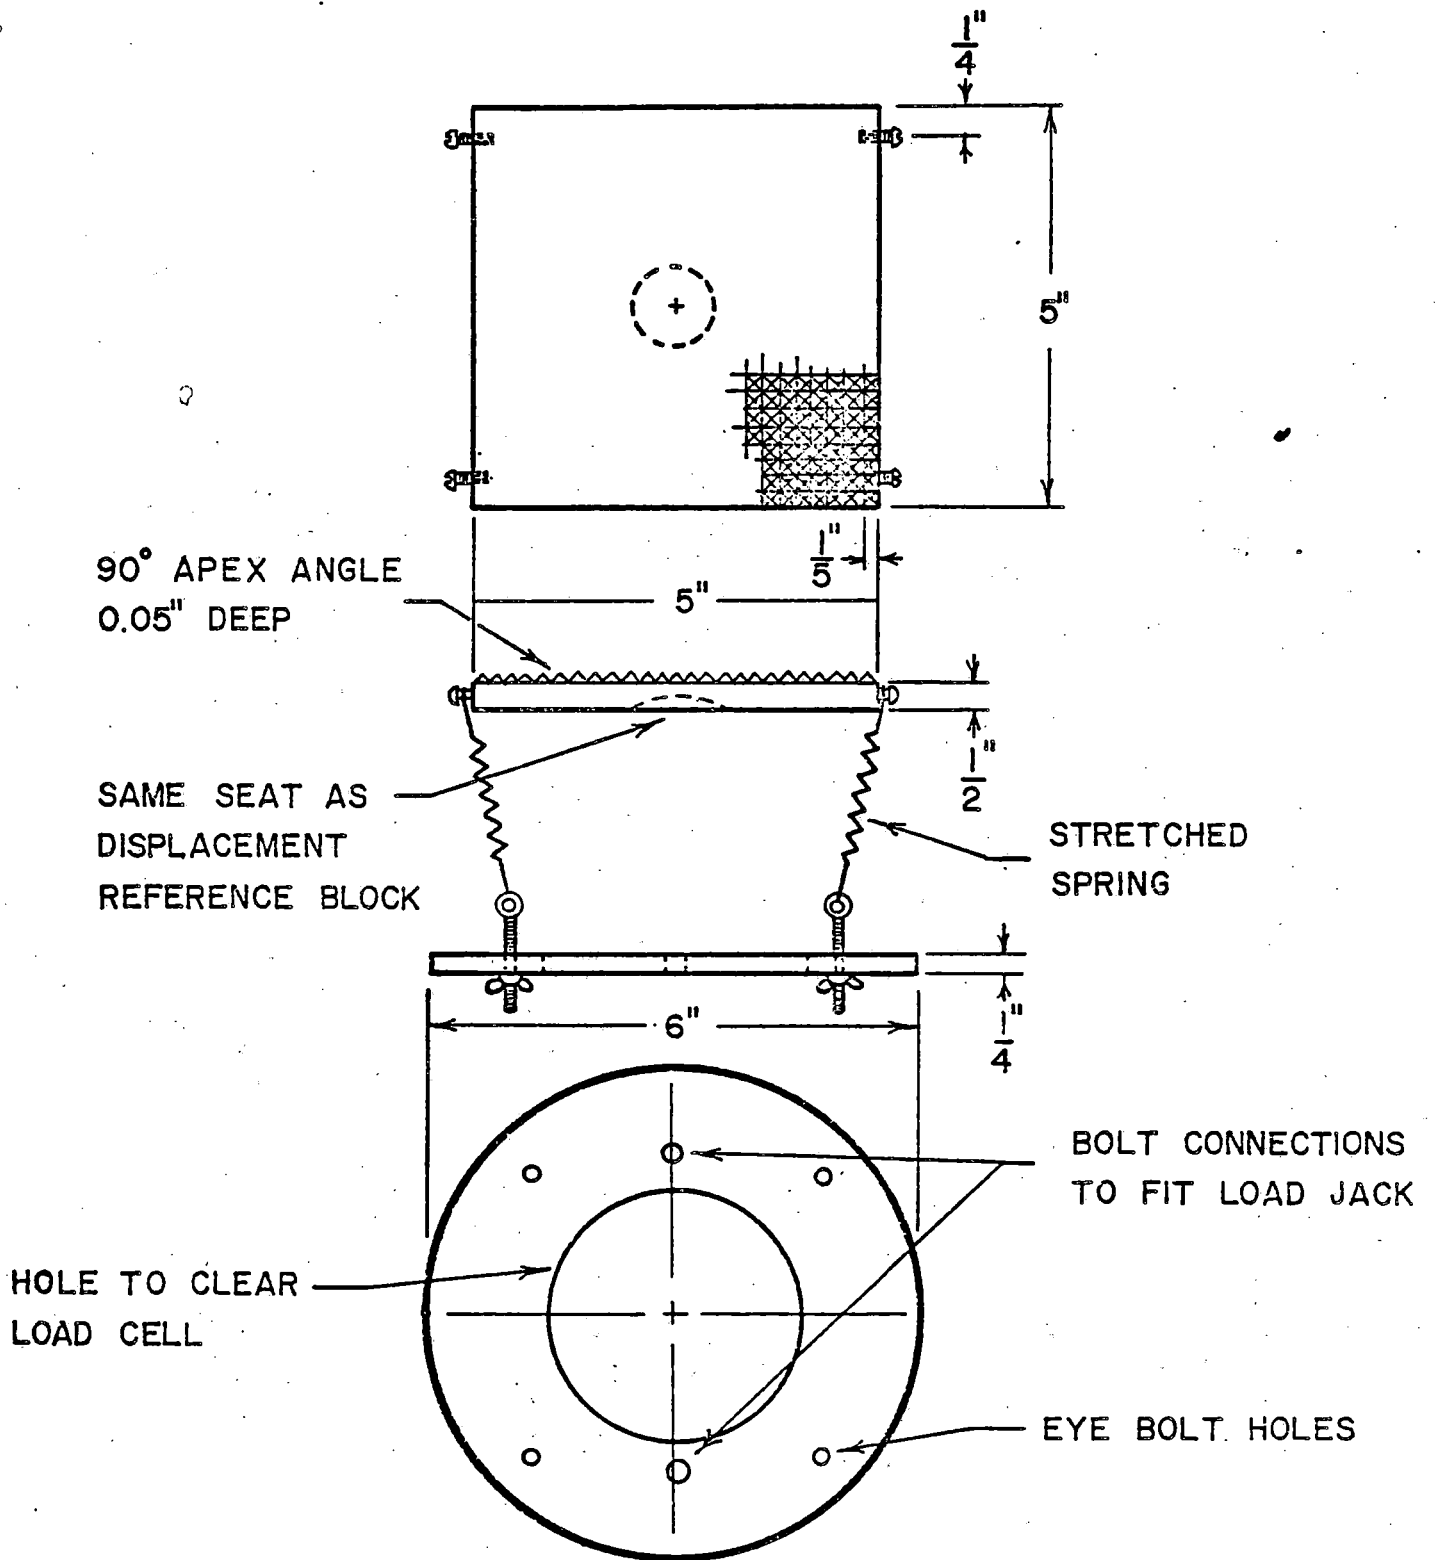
SERRATED SEATING PLATE ASSEMBLY
